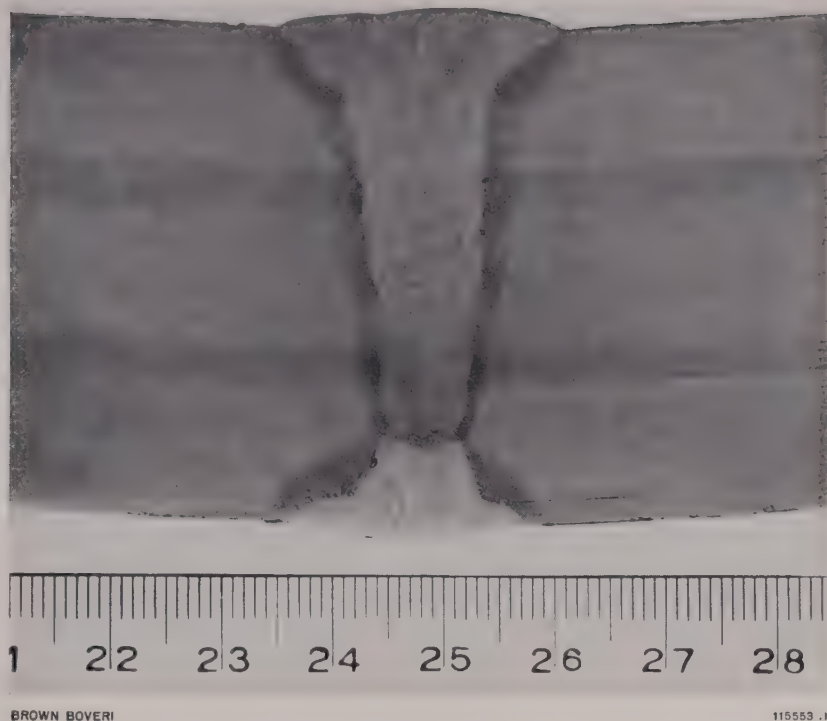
illustrates a macrograph of a single-U butt weld in steel type A 302 B with a thickness of 70 mm, executed with wire 4 mm in diameter using tandem heads.
